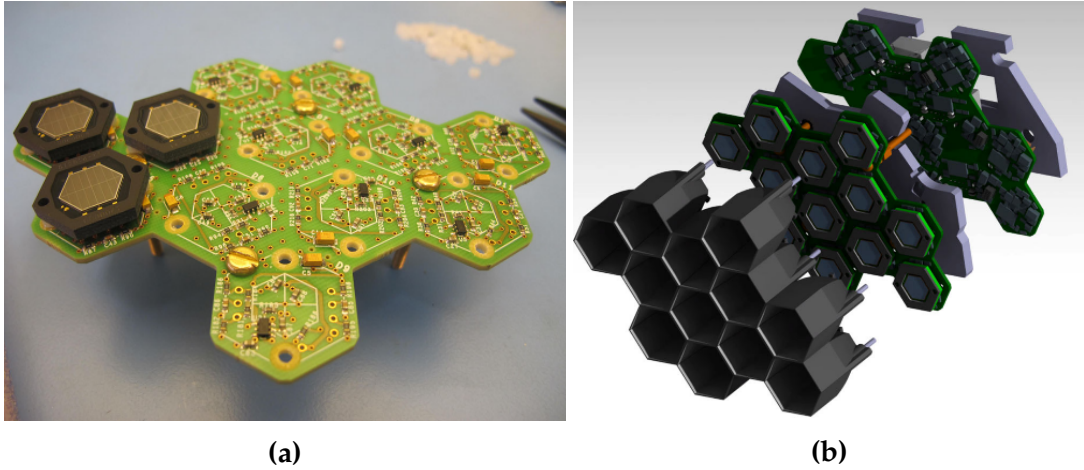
Left: Picture of a pre-amplification board with three SiPMs mounted on it. Taken from [84]. Right: CAD drawing of a PDP module. A PDP module is composed of: 12 hollow light guides, 12 SiPMs, a pre-amplification board and a slow control board. Taken from [84].
